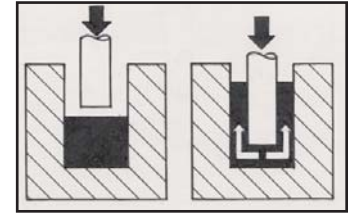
Impact extrusion, another cold forging process, produces hollow parts. Here, the metal flows back around the descending ram.
